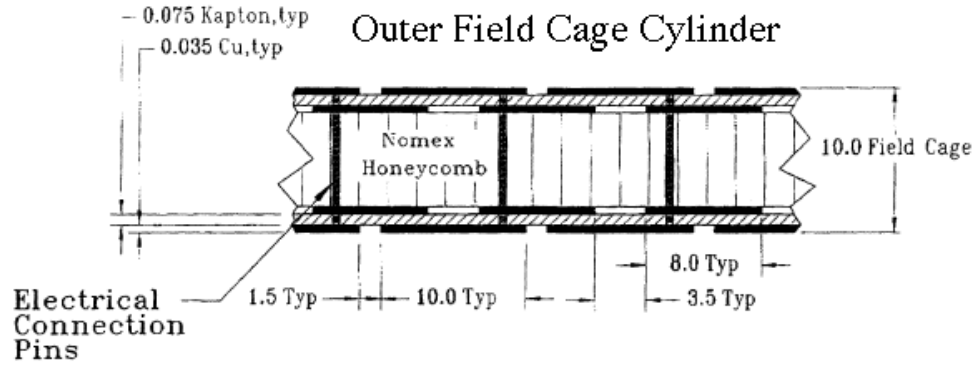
Outer Field Cage structure. Dimensional units are in millimeters.
